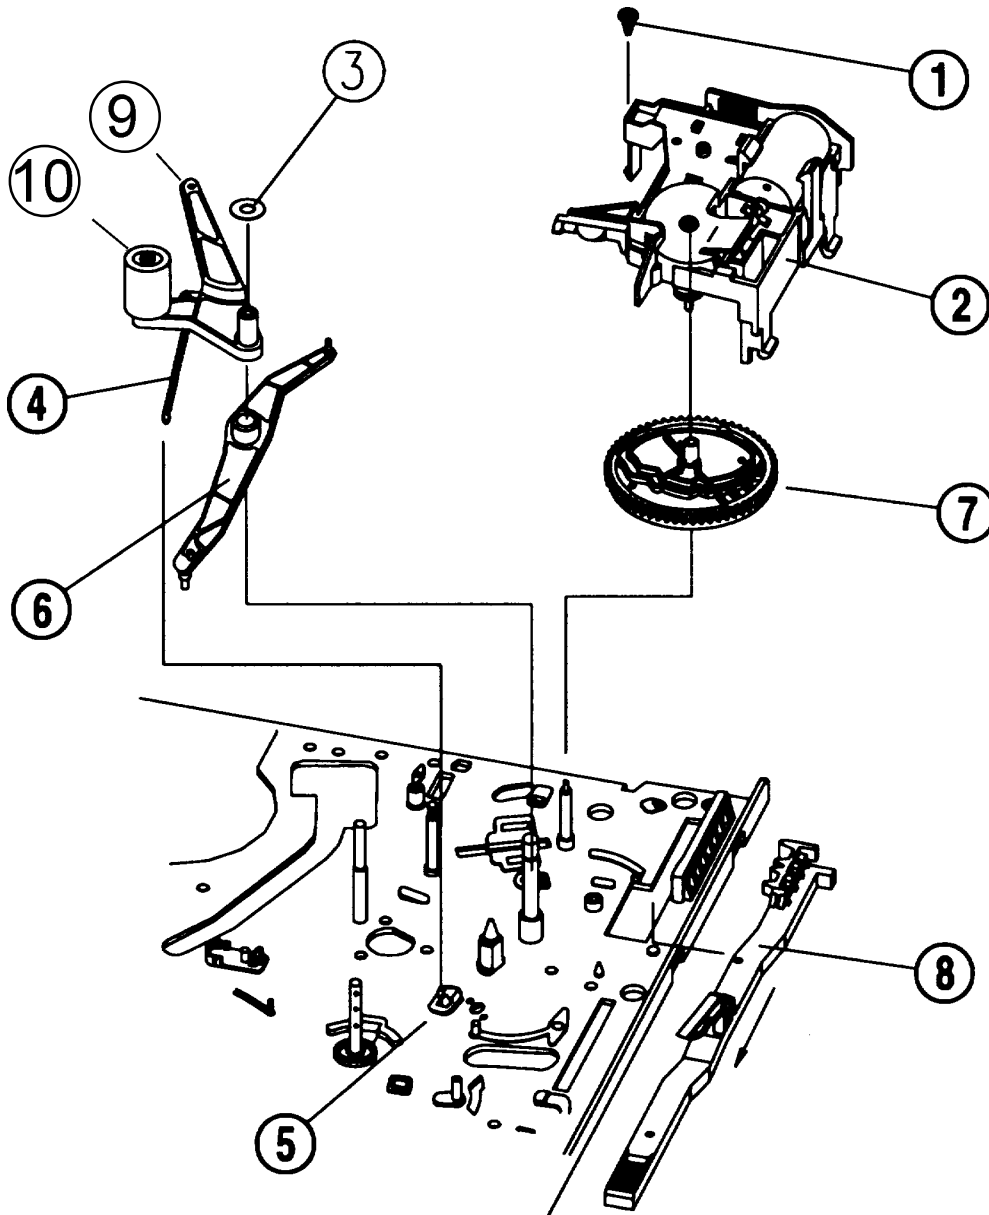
Replacement of L/C Bracket Total Assembly/ Pinch Lever Total Assembly/ Cam Gear/Relay Lever/F/L Rack
